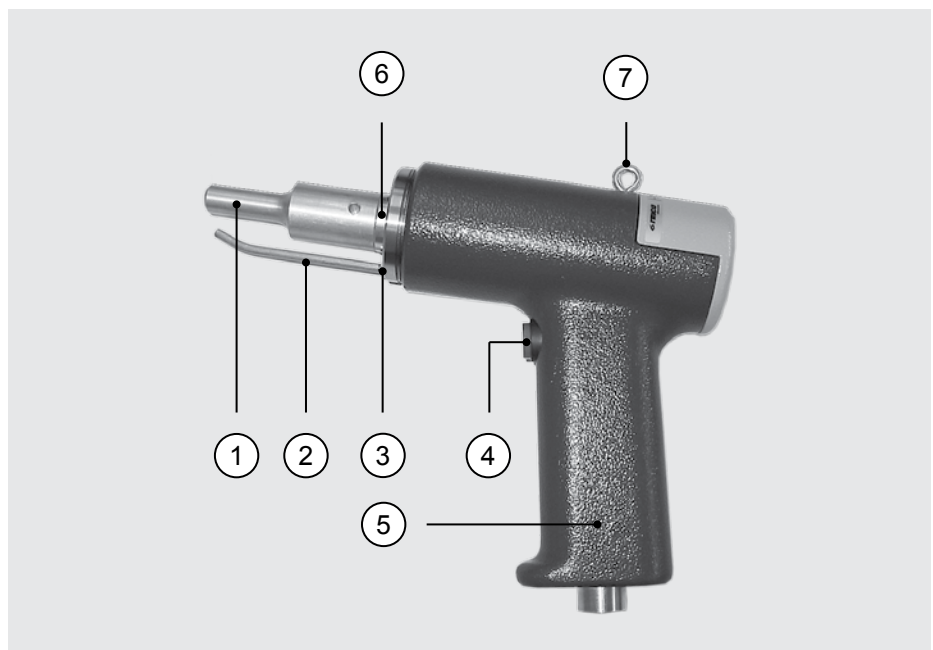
HG35-4 ultrasonic hand welding unit with air cooling
